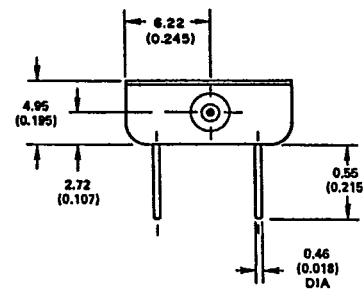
Dimensional Outline - C30986-XXXQC-YY
